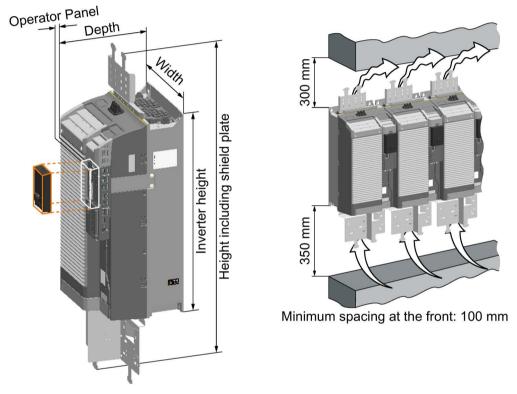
Dimensions and minimum spacing to other devices, FSD ... FSF
